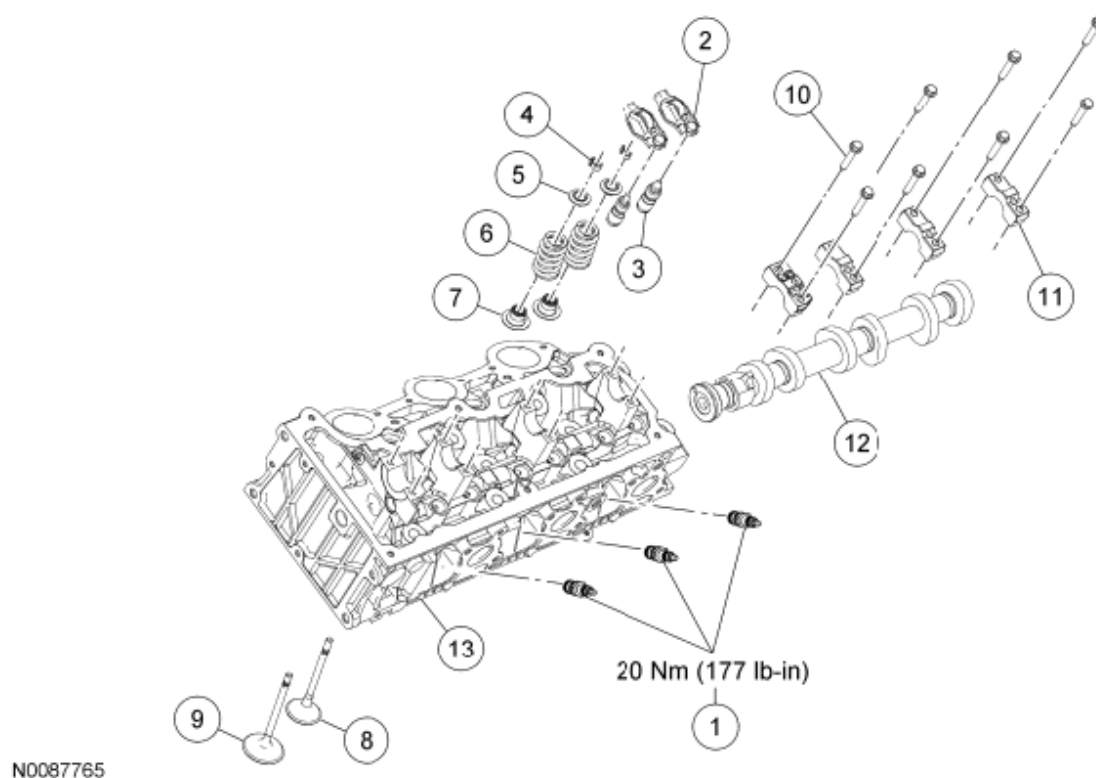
Exploded View Of Cylinder Head With Torque Specifications
